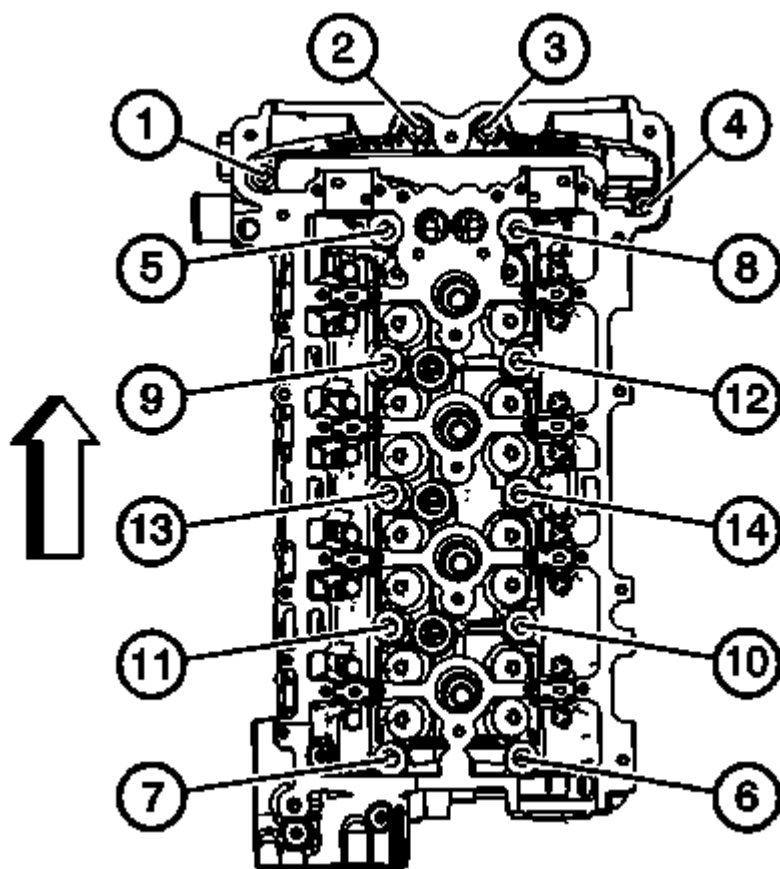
Cylinder Head-To-Block Bolt Sequence
